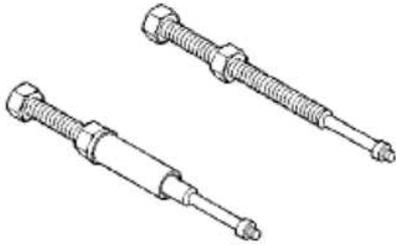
Steering Shaft Roll Pin Remover/Installer 6831A
